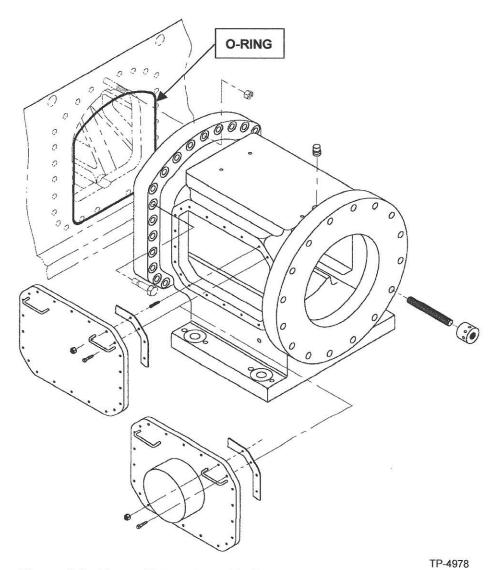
Frame Extension with Standard or Explosion-Proof Cover
